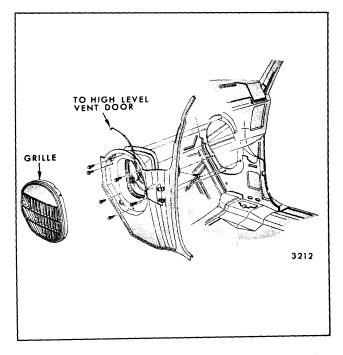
Shroud Side Finishing Panel - "B & C" Styles
